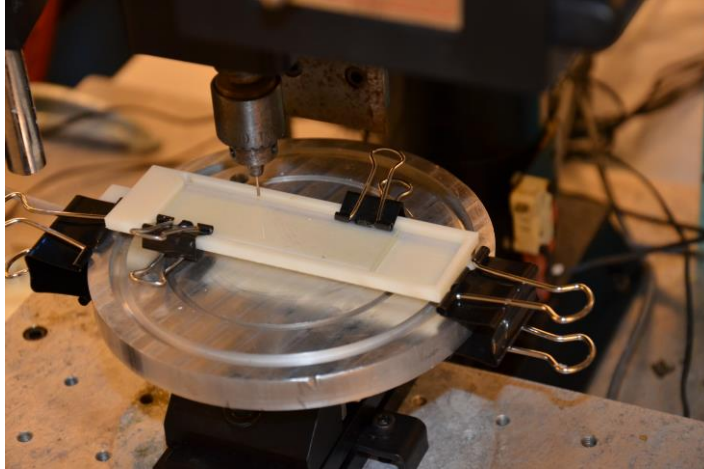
Microscope slide chuck clamped onto the Microfluidics Lab CNC Mill
